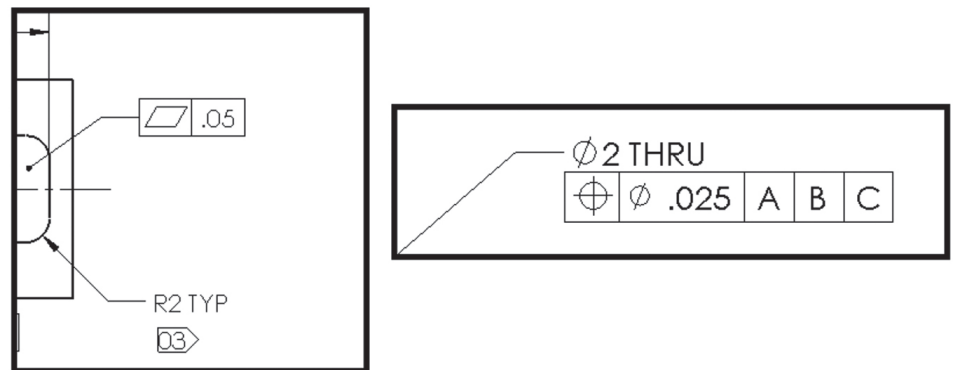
Sample images from an engineering drawing using GD&T symbols.
